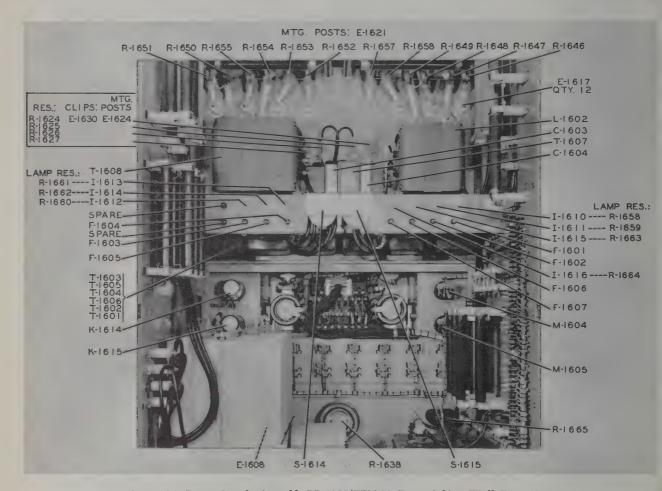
Power Supply Assembly PP-1089/FRT-22, Front Cabinet Wall, Rear View.
